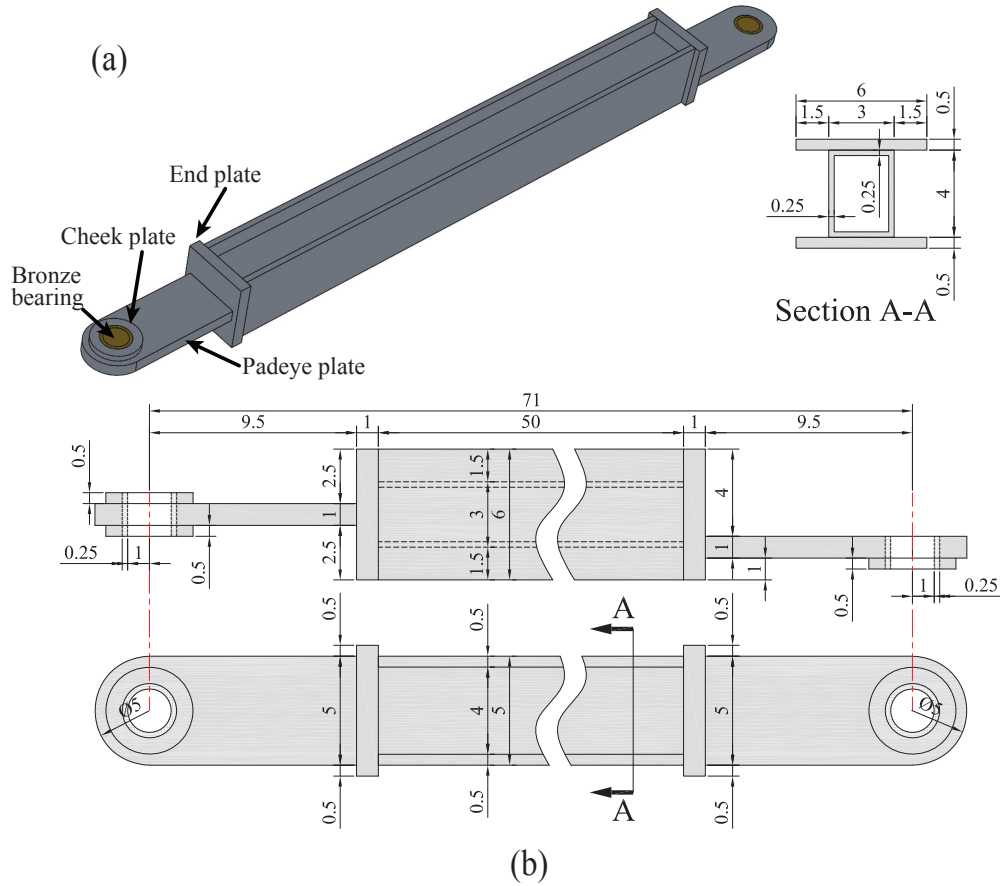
Design of the tensile link: (a) perspective view and (b) side view and section view (units: inch).
